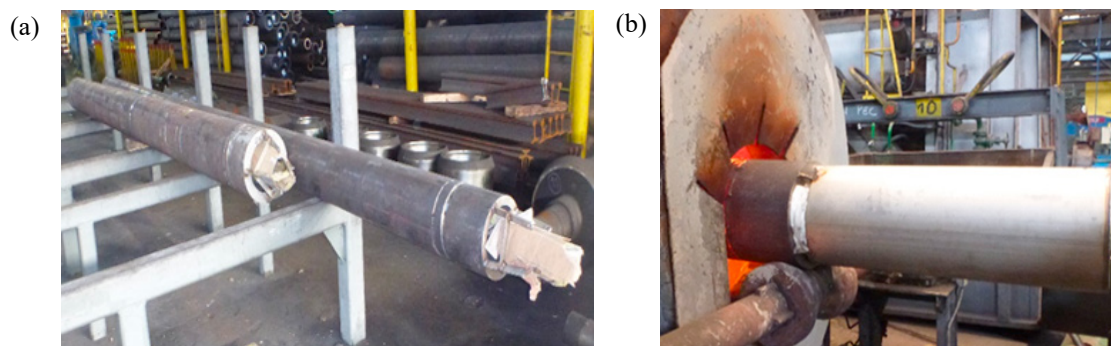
(a) Example of tube real mill samples embedded by thermocouples; (b) tube sample moving to furnace.
